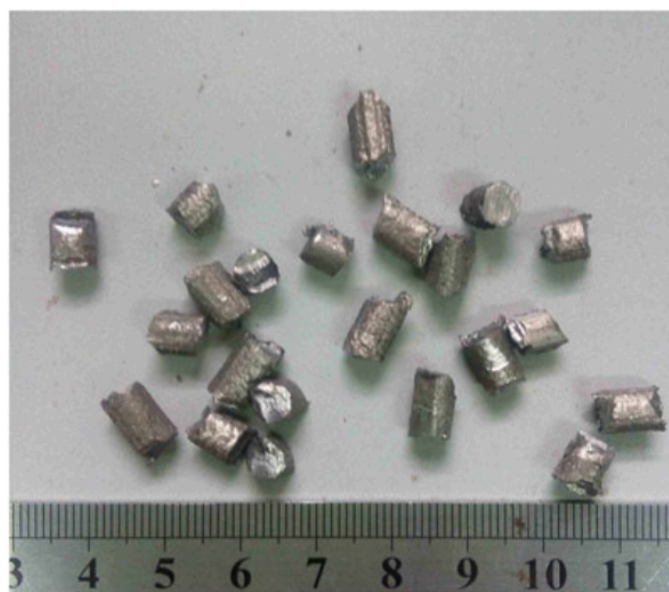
Hot extruded Al-CNT master composite at 390°C.[104]
